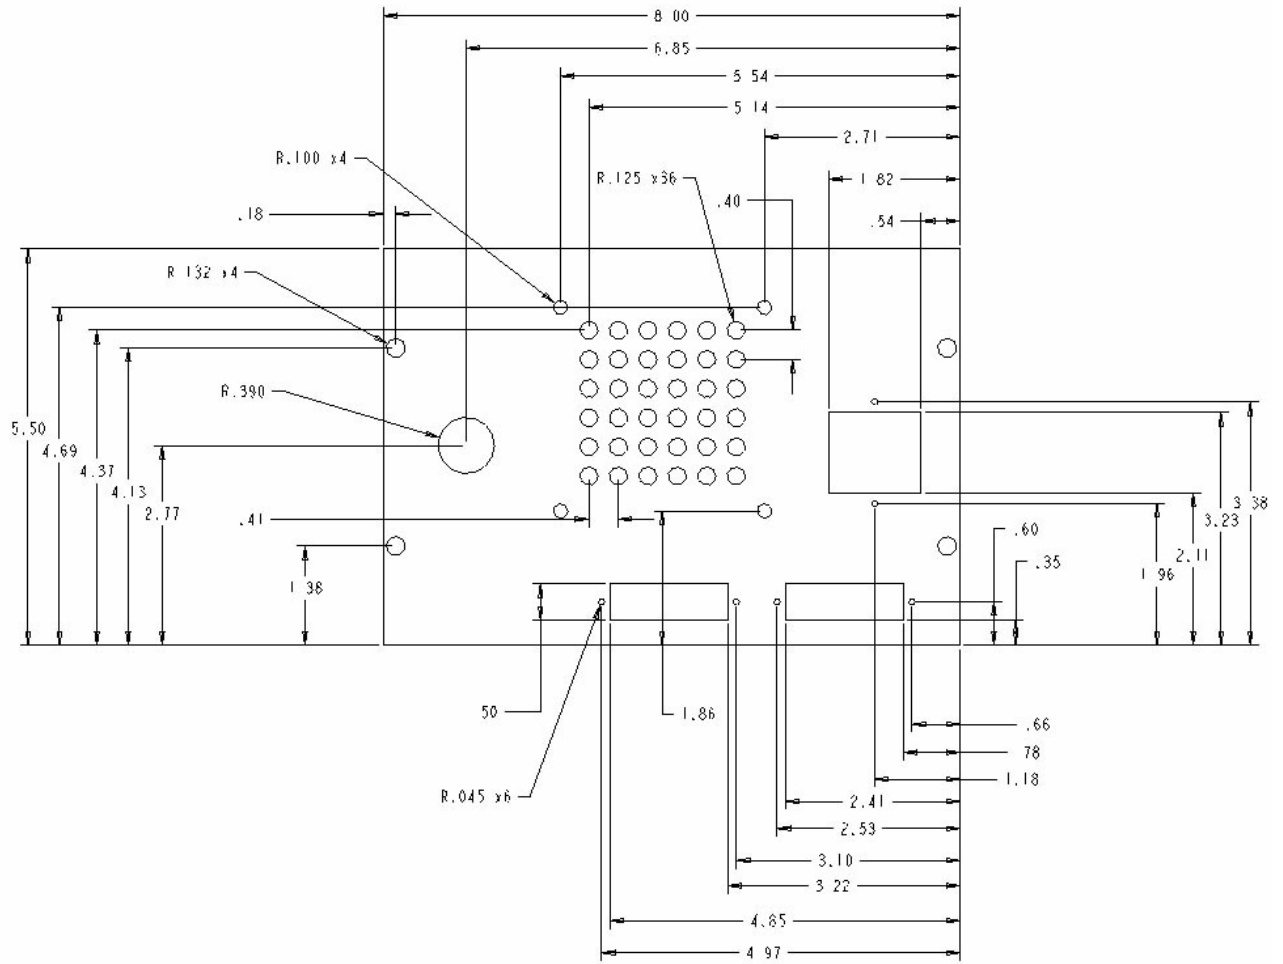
Dimension Drawing of Power Supply Box Plexiglas Panel
